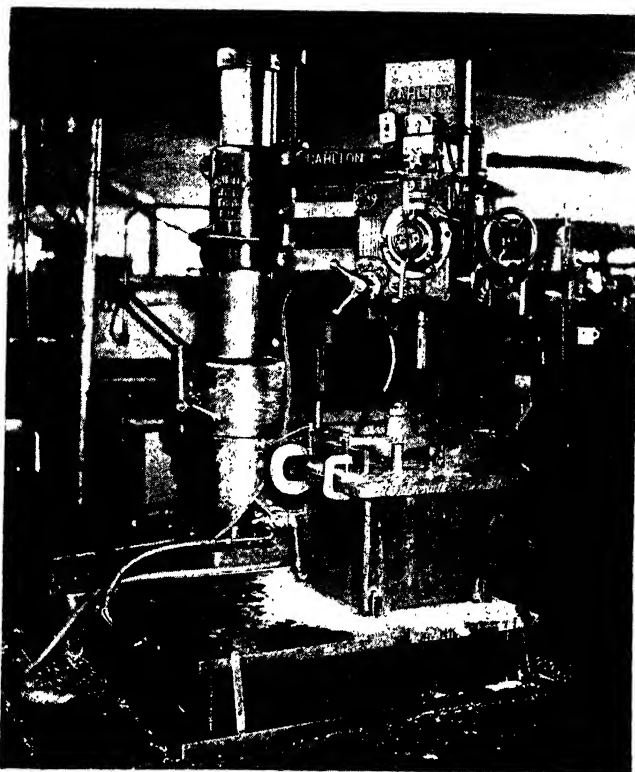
Specialized welded machine tool bases and work tables such as this one may be made economically and quickly within the plant where they are needed. They often increase the efficiency of the machine, as shown by this two-station base which almost doubles the output of this radial drill on some jobs. (Courtesy of R. G. LeTourneau, Inc.)
